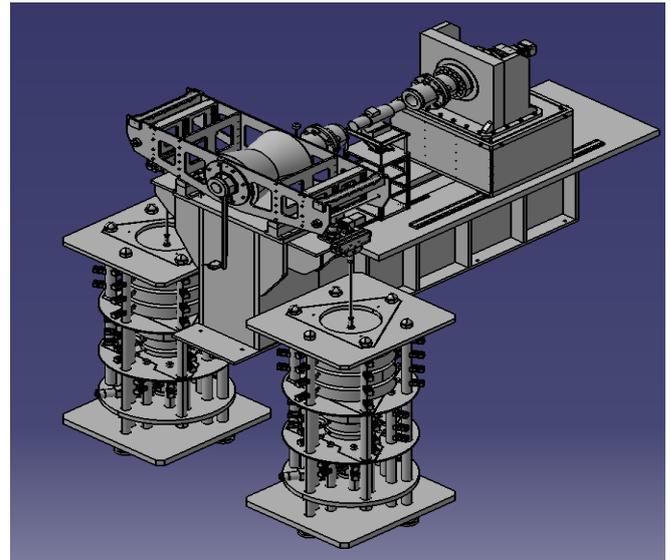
A design of the 20 kN m deadweight torque standard machine in KRISS
